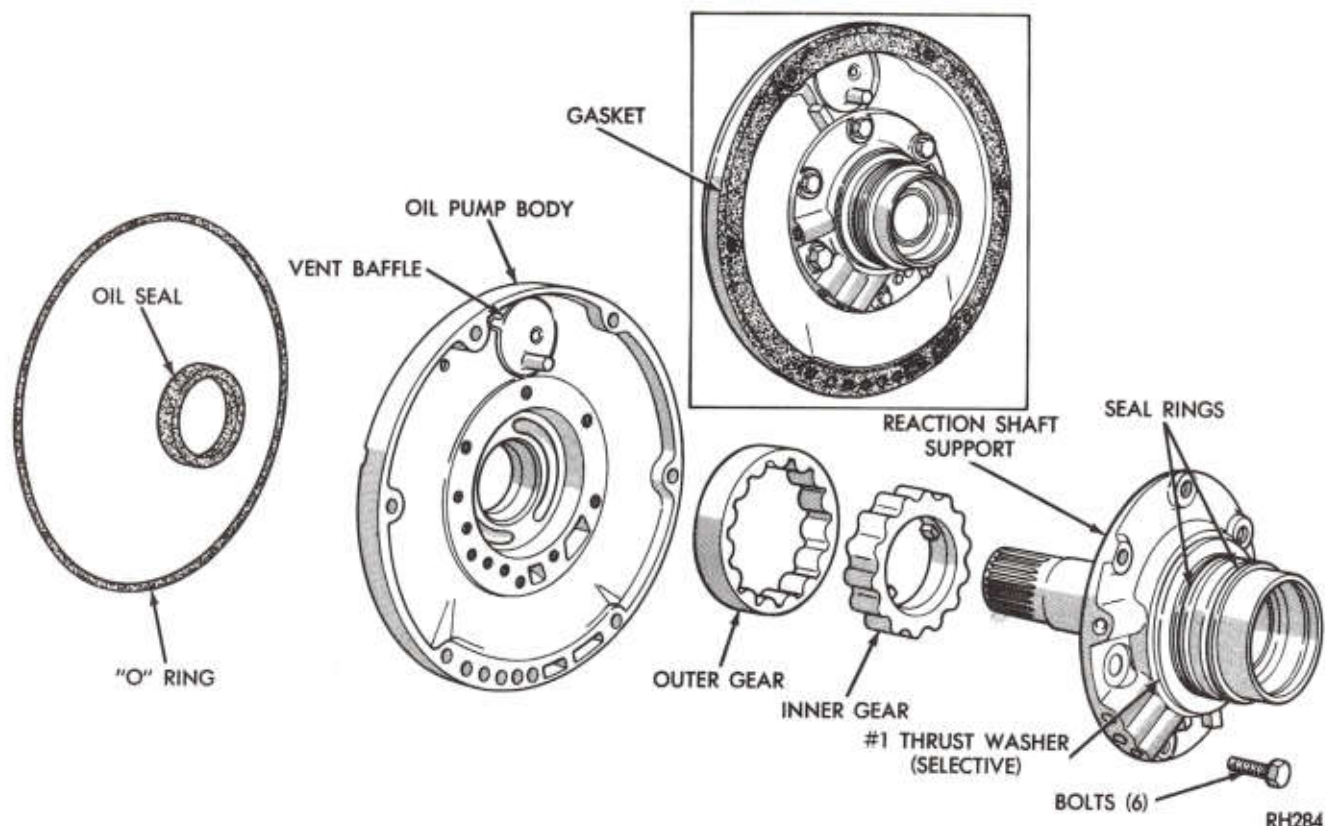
Oil Pump and Reaction Shaft Support (A-727)
